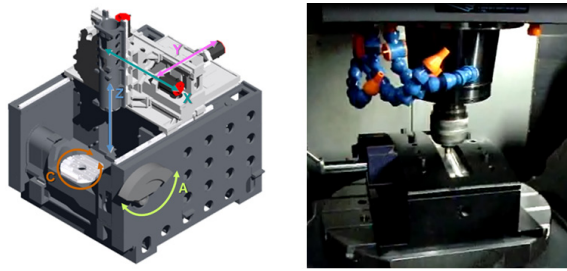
3-dimensional FSW test using 5-axis machining center (HWACHEON)
